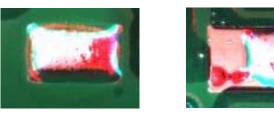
Solder Pad coverage. Photo to the left tin-lead solder, to the right lead-free
